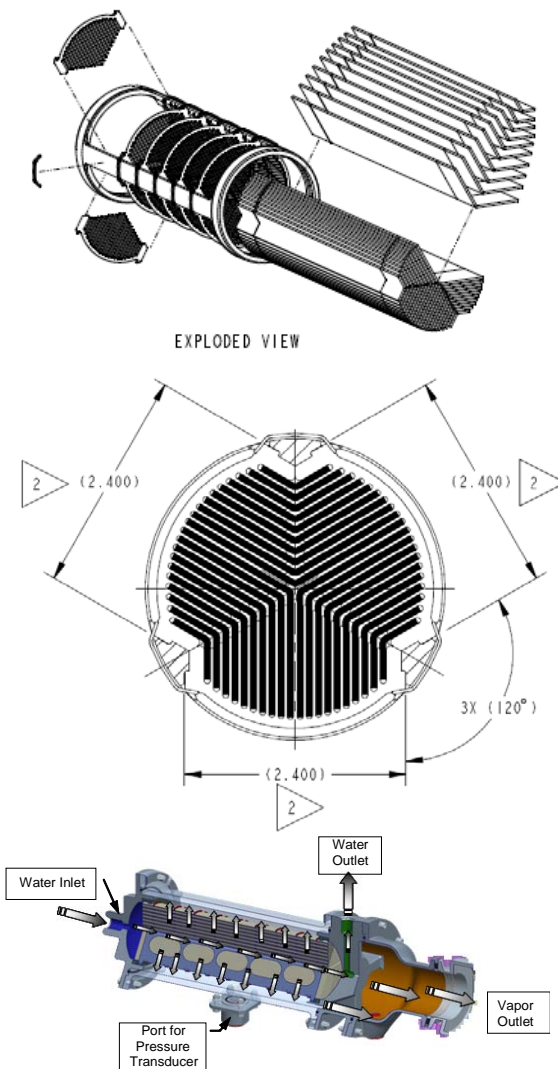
Selected components of HoFi SWME assembly.a) Exploded view of cartridge showing chevron stacks; b) View of 3-comb layer showing slots for 30 chevrons; c) Section of HoFi SWME showing flow paths of coolant and evaporant
